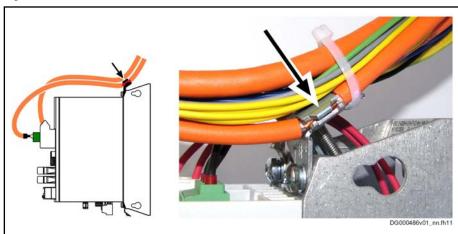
Shield Connection of Shielded Lines at the Top of the Device
